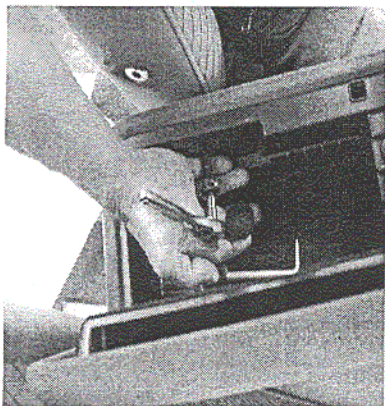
This armrest is removed by unscrewing a bolt from the inside, which is concealed behind a trim cover.
